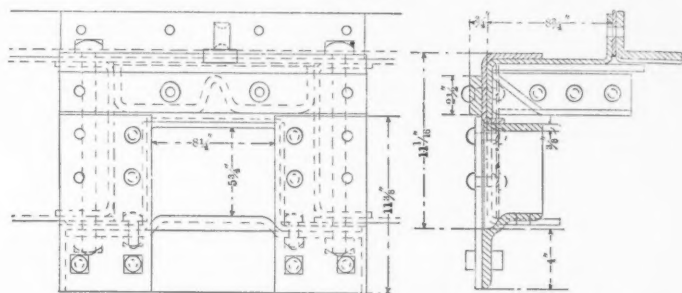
END SILL AND STRIKING PLATE CONSTRUCTION ON SECOND LOT OF GONDOLA CARS (O-14).
